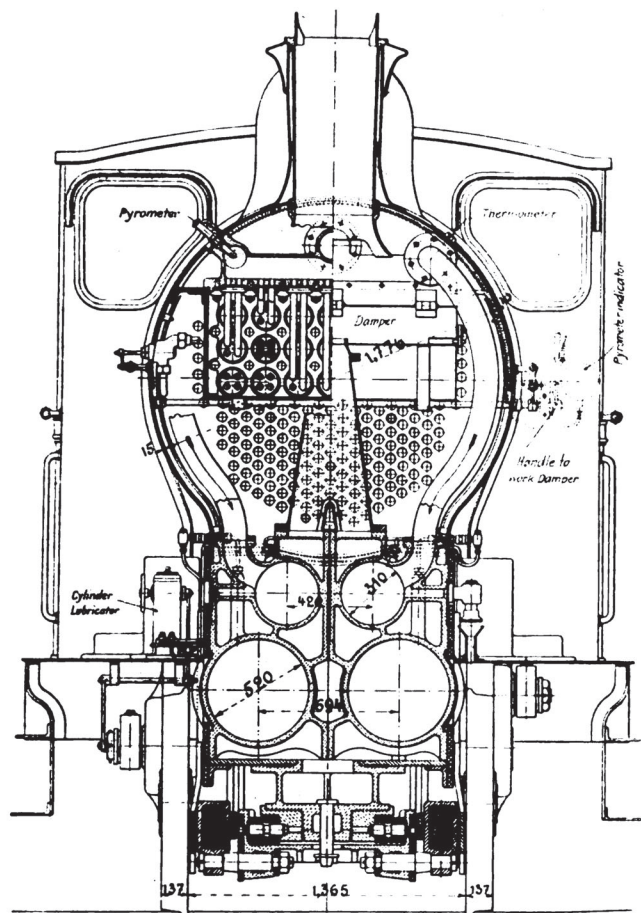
Six Wheels Coupled Locomotive: Belgian State Railway.
